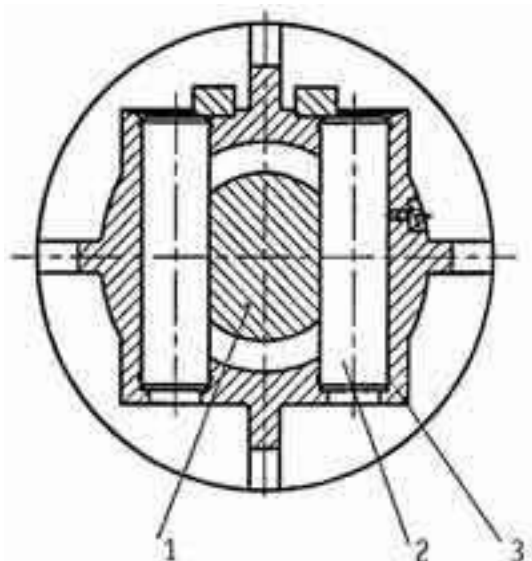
Transverse section hammer: 1 - tool; 2 - fixing finger; 3 - box [18]
